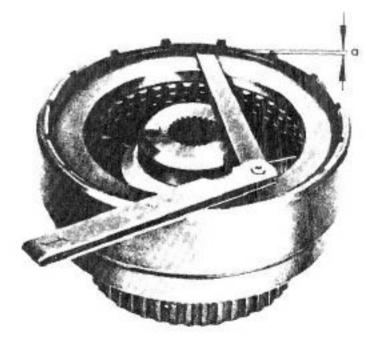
Measuring forward clutch end play. Use a feeler gauge to measure clearance a between the end plate and the large outer circlin.
